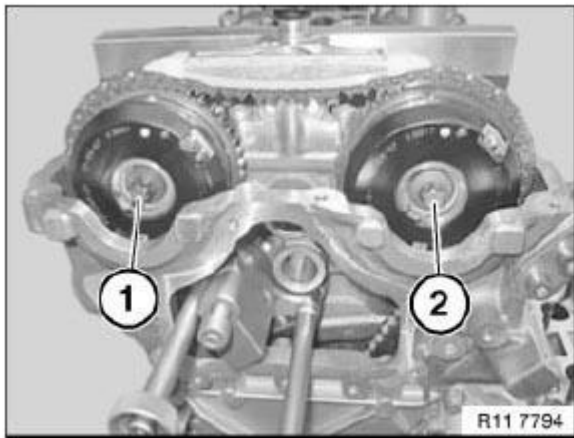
Identifying Inlet And Exhaust Camshaft Central Bolts
